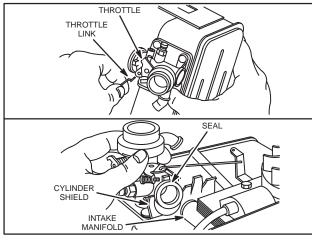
REMOVING CARBURETOR MODEL SERIES 100900, 130900, 131900, VERTICAL CRANKSHAFT
